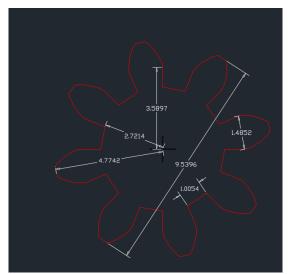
8 Toothed Gear AutoCAD Drawing, Dimensions in mm
